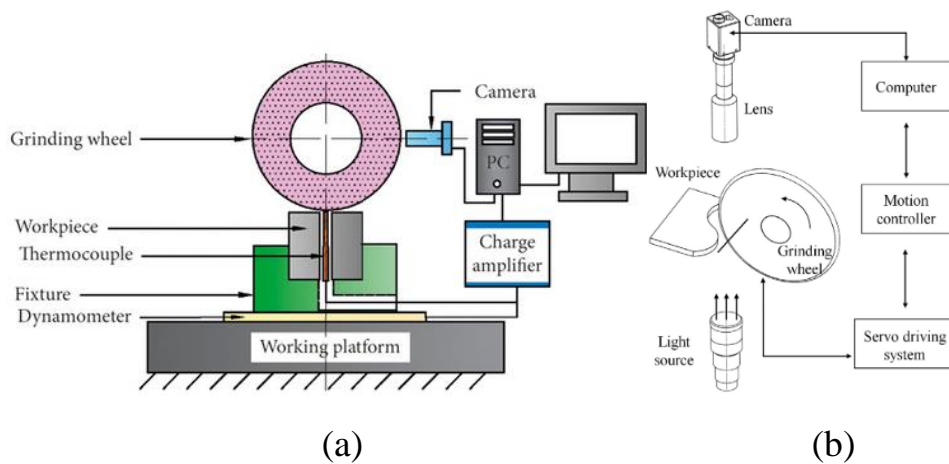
Set up of experiment test for the measurement of the grinding wheel (a) Monitoring of the grinding wheel wear [77] (b) Machine vision measurement of profile grinding wheel [81]
